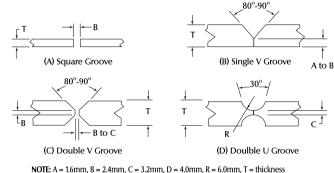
Joint Designs for Gas Metal Arc Welding of Copper.
